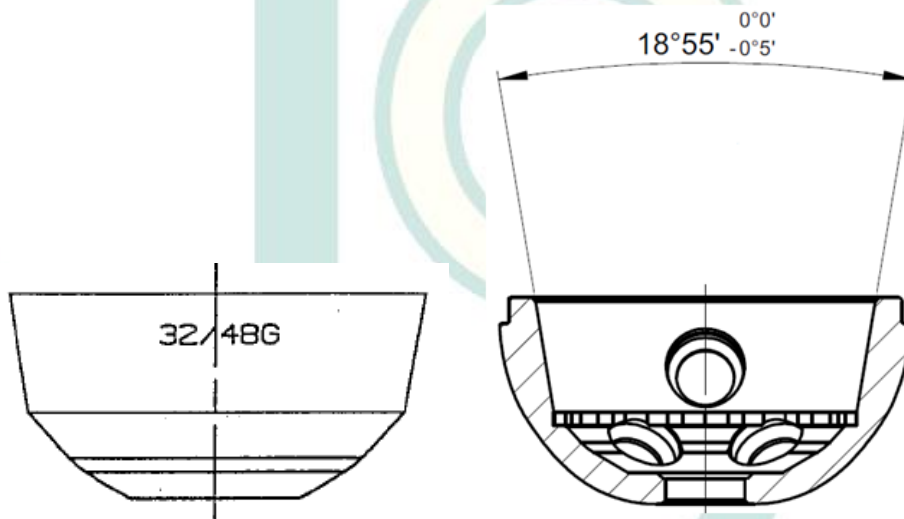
SHELL – LINER CONICAL TAPER FIXATION (LINER LEFT; SHELL RIGHT)
